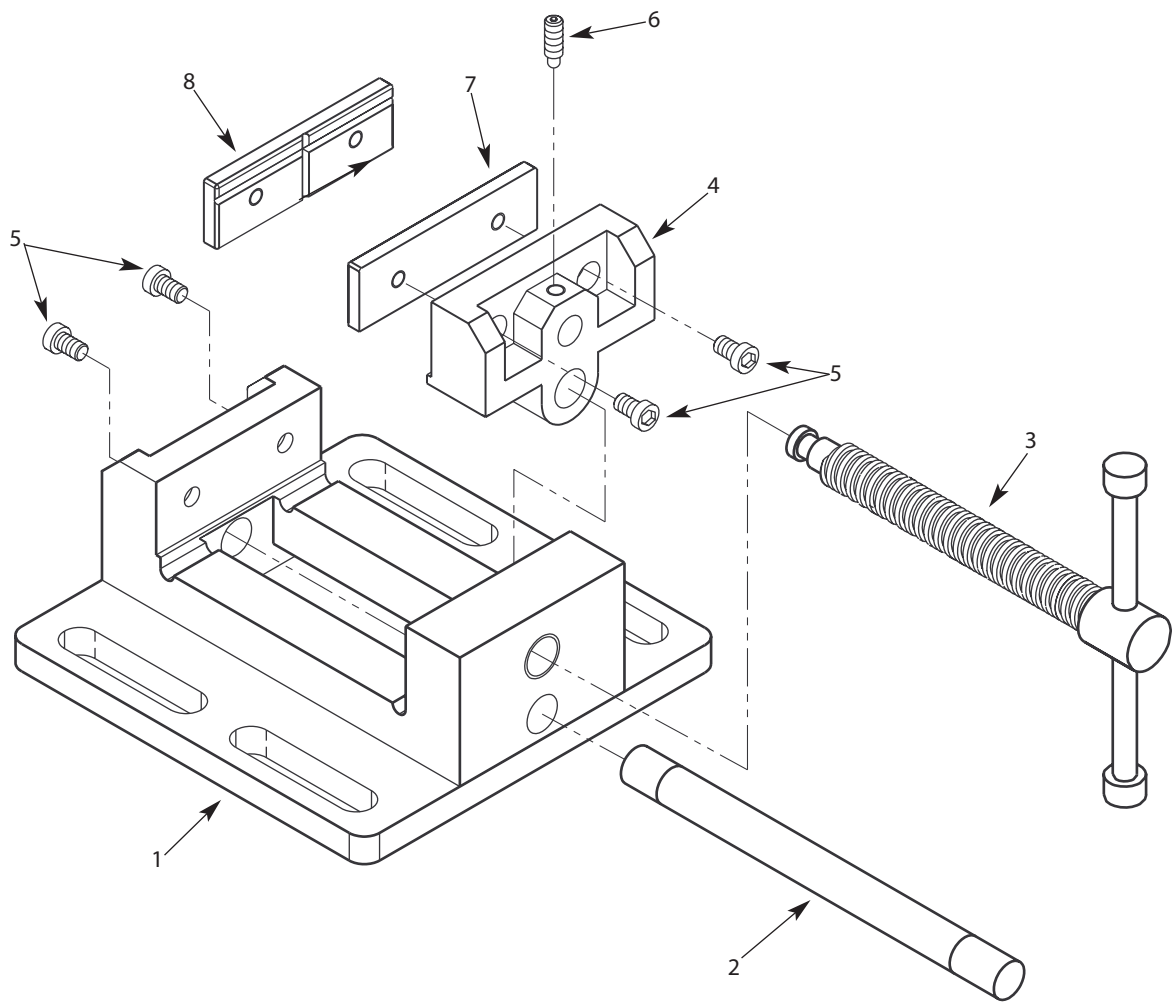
Replacement Parts Illustration for 3", 4", 6" and 8" Low-Profile Drill Press Vises
